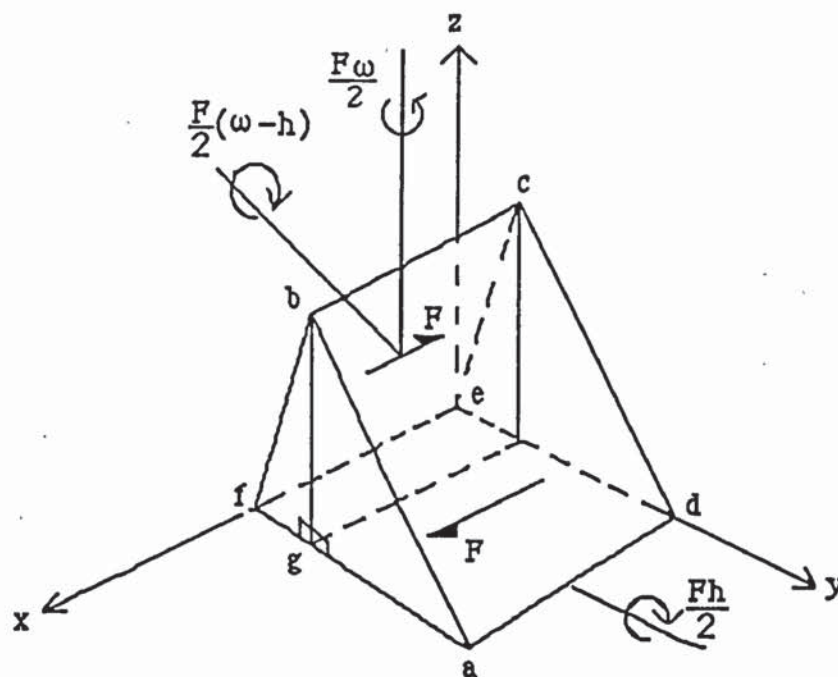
The total force system acting on the longitudinal shear fillet weld abcdef .
